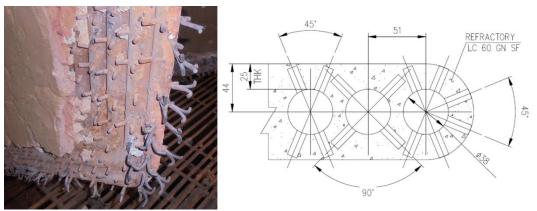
& Figure 14: Photo shows the refractory spalling due to excess refractory. The figure shows the refractory desirable for erosion protection of the outer most tube of wingwall evaporator / SH bottom / bend section. Long anchors are not required at all.
